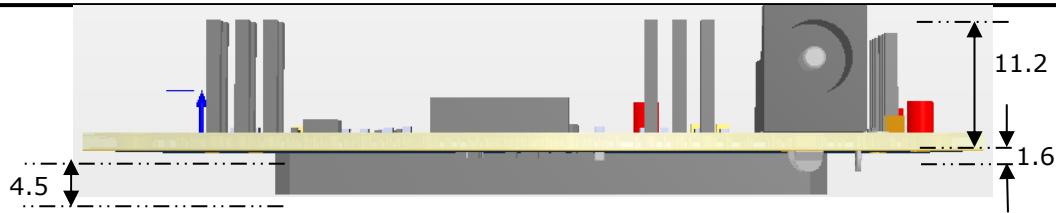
UMFT600A/UMFT601A Dimensions (Side view)
